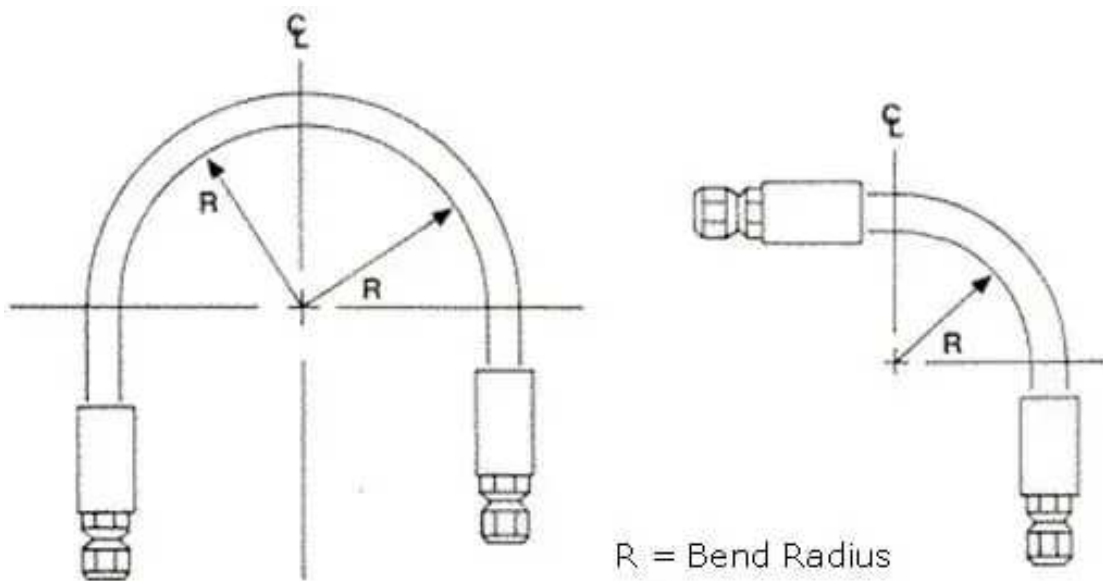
Cable assembly installation shall ensure a sufficient bending radius, the minimum bending radius is generally 8 times the diameter is recommended
